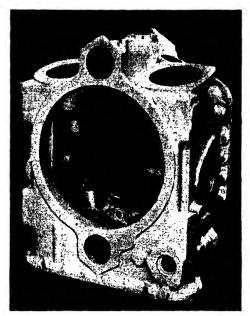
AIRCRAFT ENGINE TIMING GEAR CASTING
